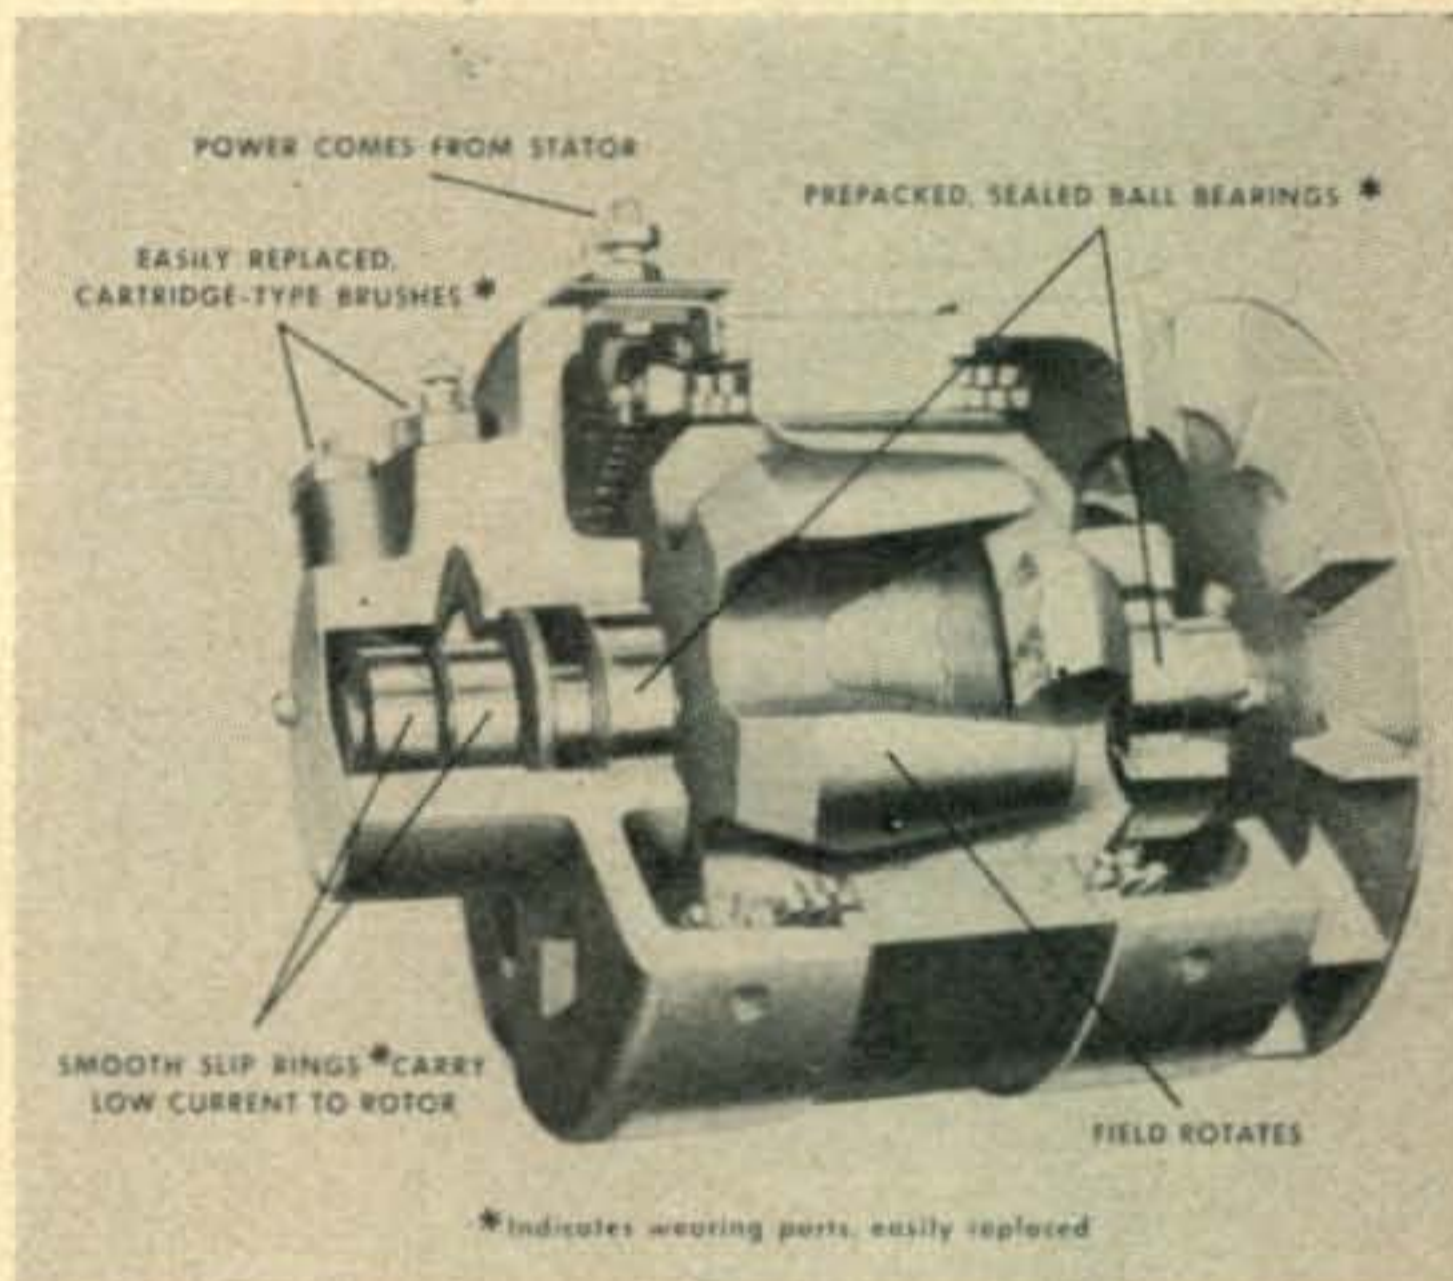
Cutaway view of the Leece-Neville alternator, showing important parts.
